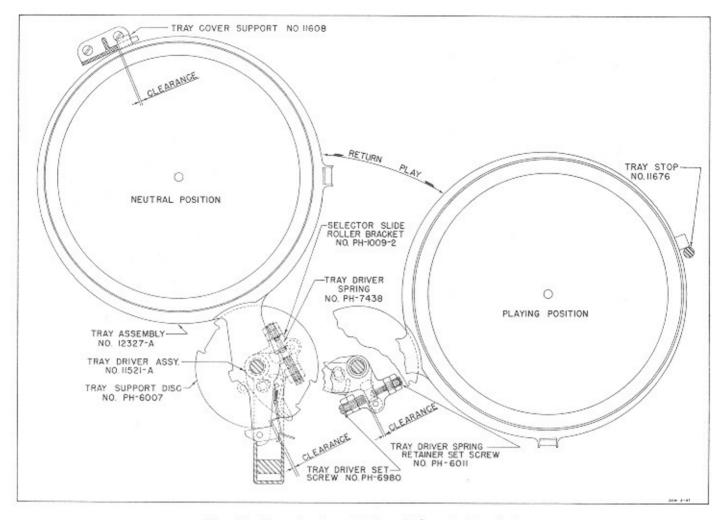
Tray Stack and Driver (Schematic Drawing)
